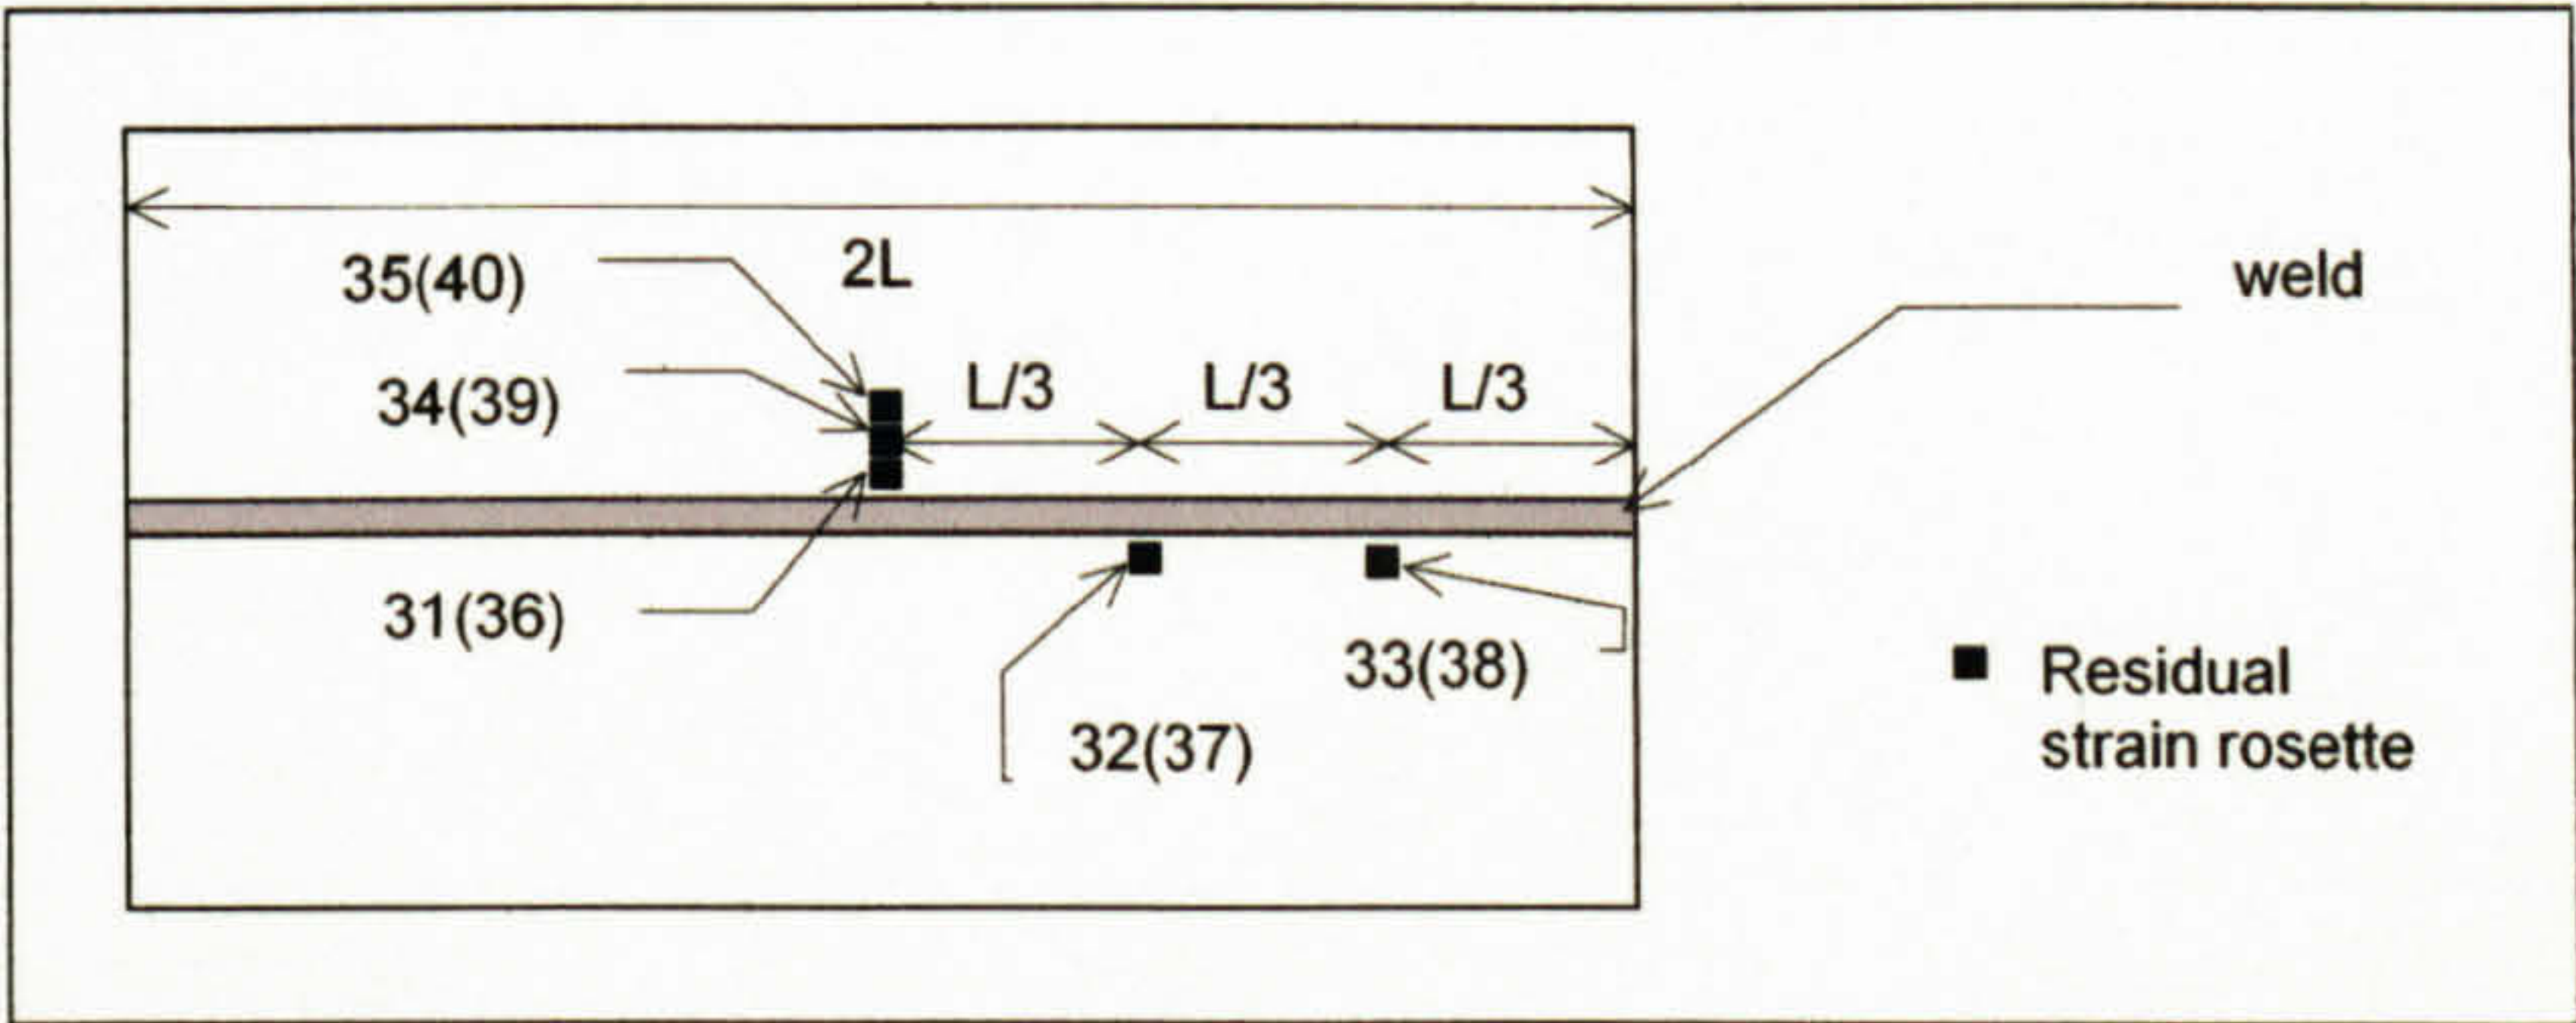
Position of residual strain gauge rosettes in relation to FS SP weld.
